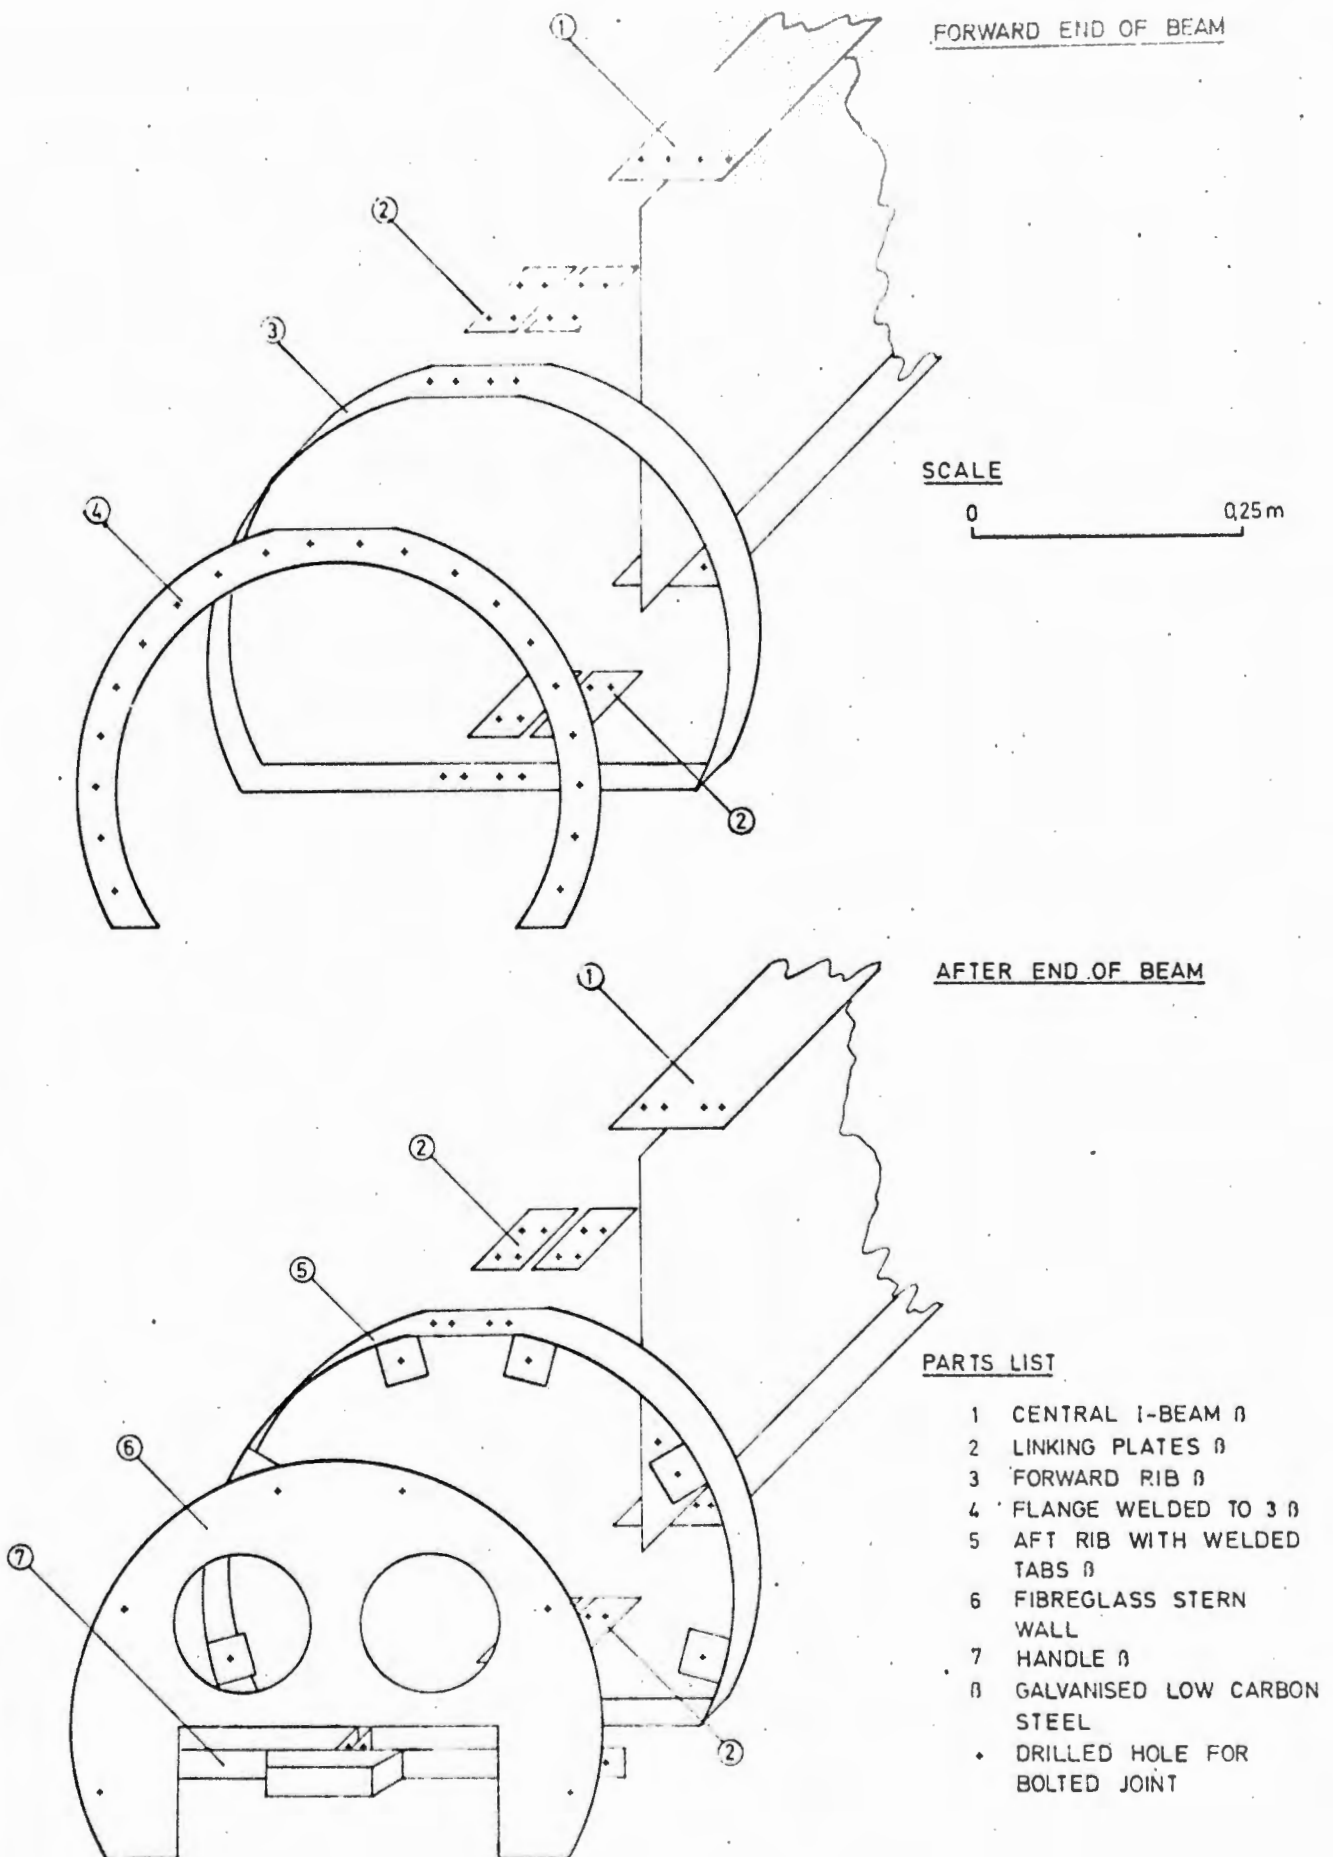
EXPLODED VIEW OF BEAM CONSTRUCTION
